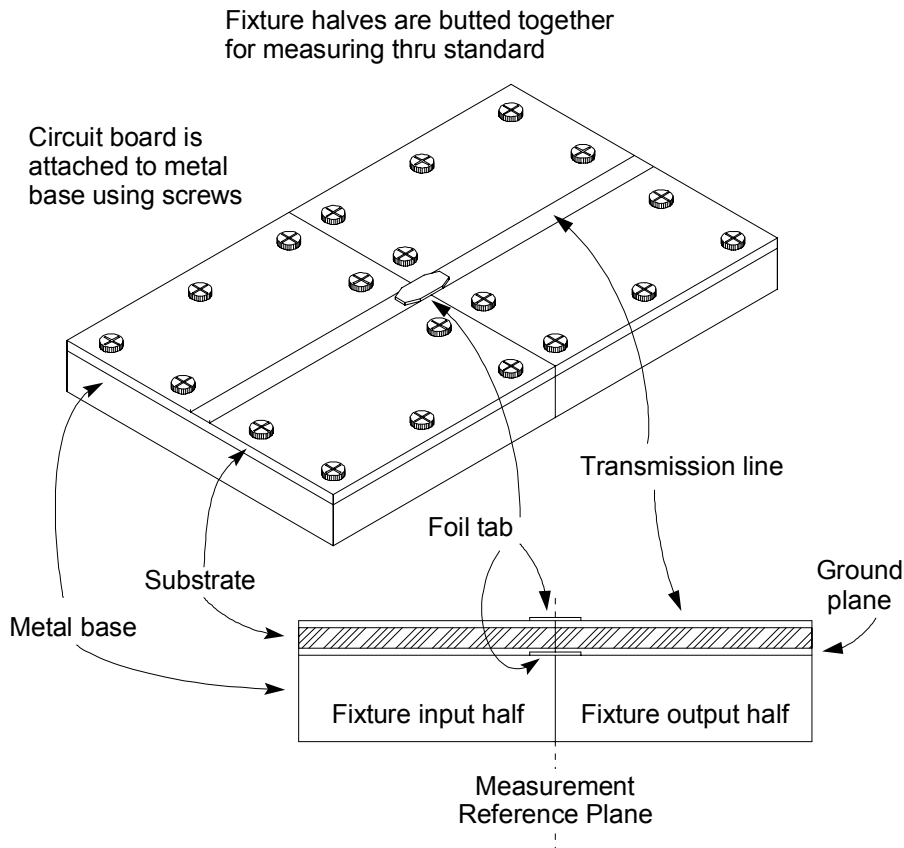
Fixture halves butted together for measurement of thru standard.
